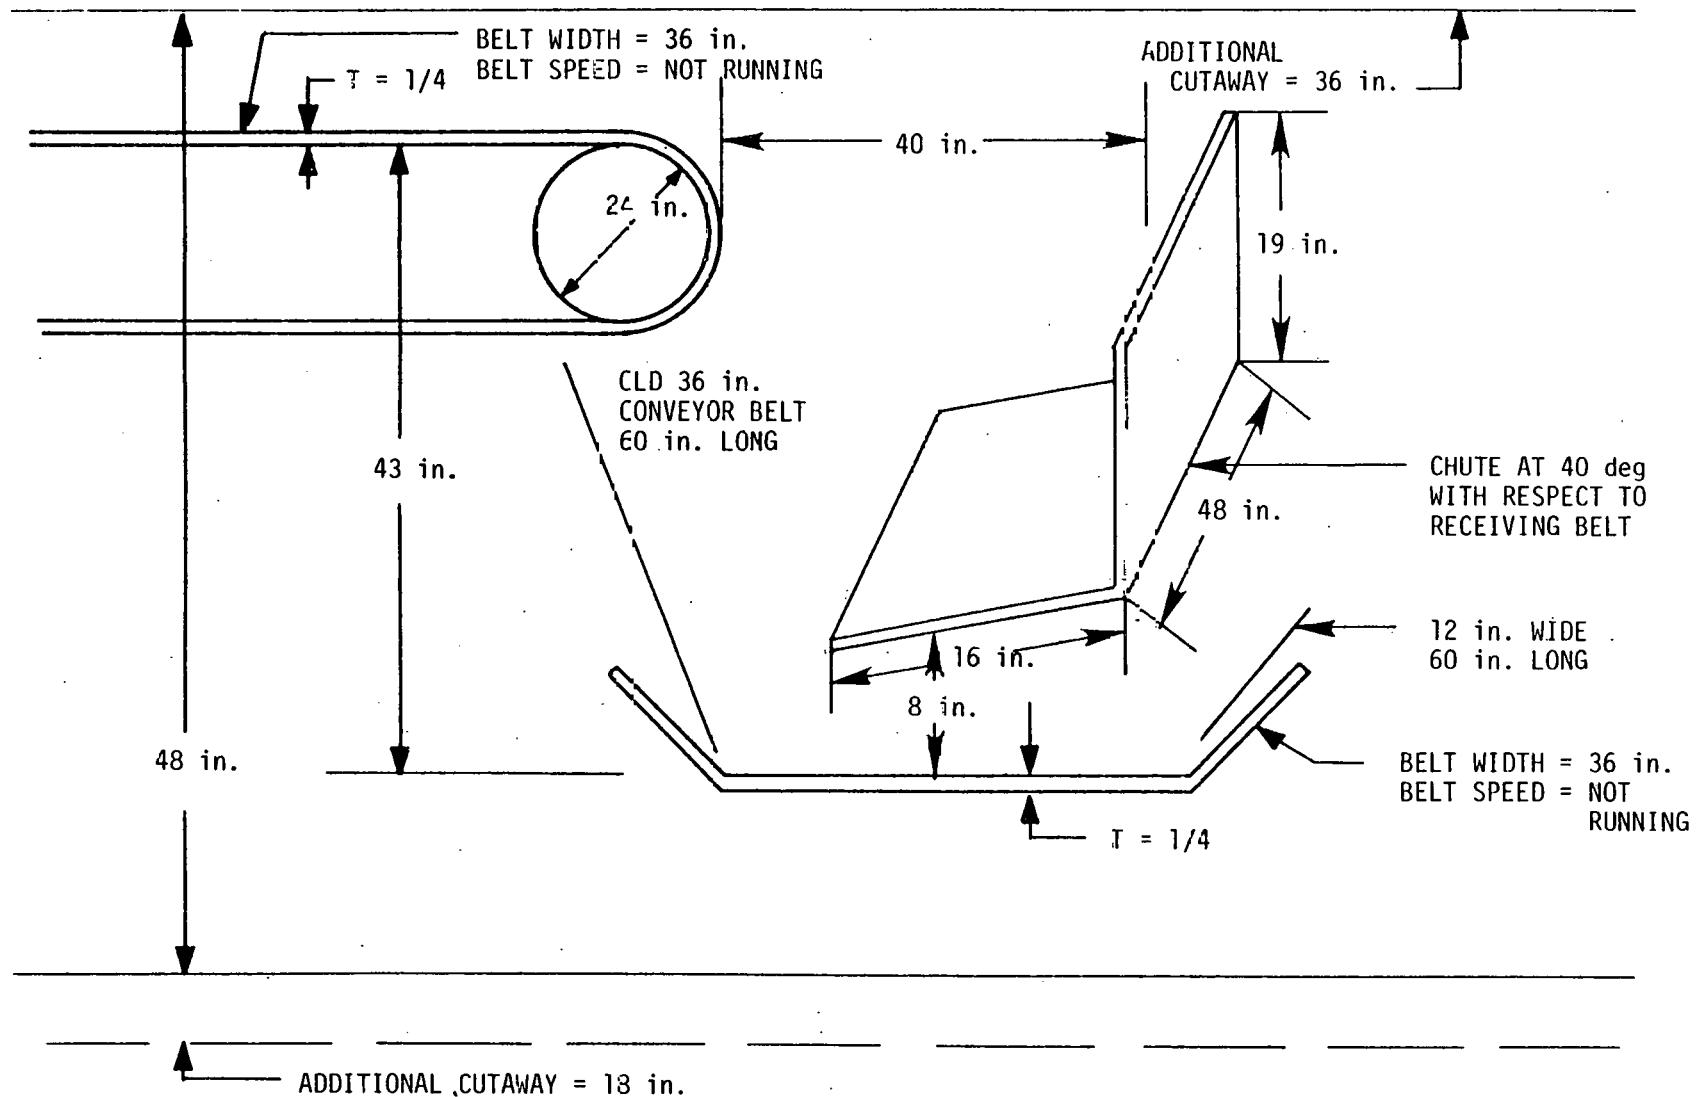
Schematic of transfer point - Mine C - location No. 1.
